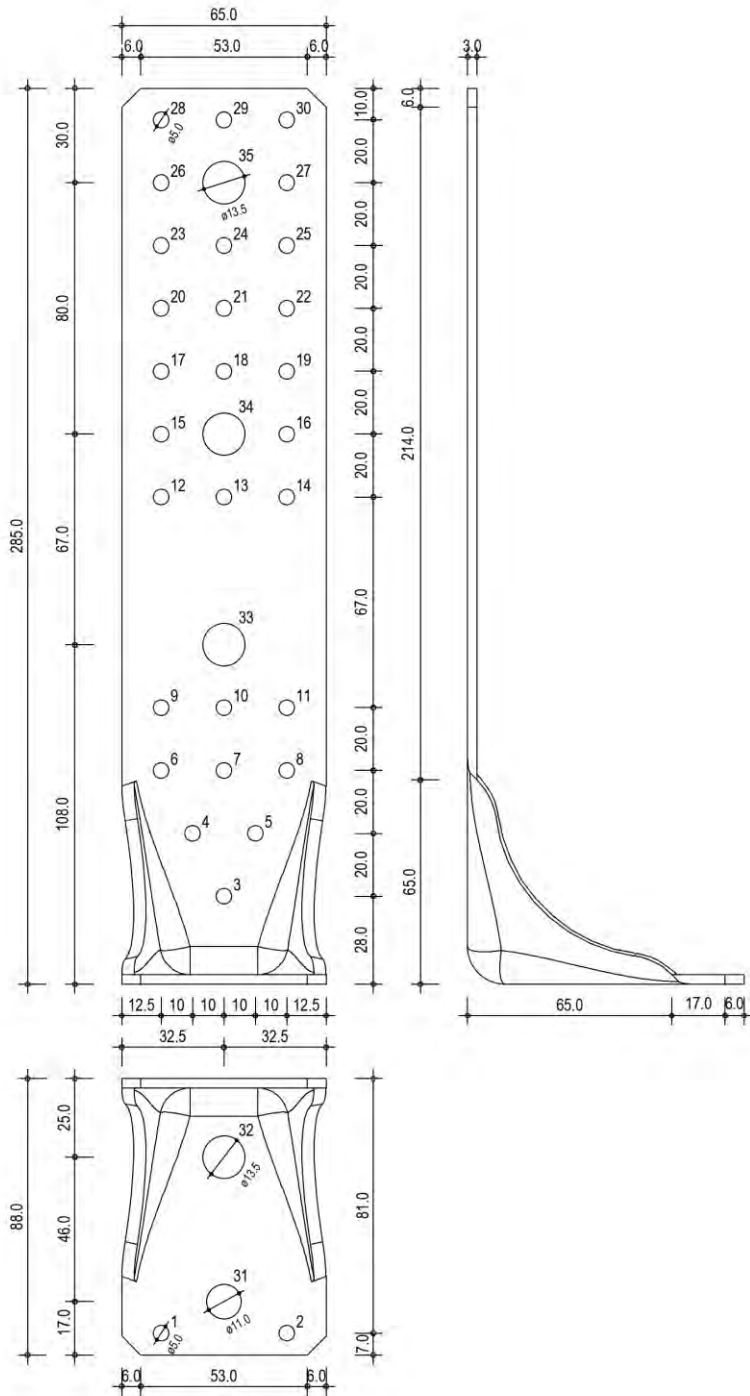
Dimensions of Angle Brackets 1102853L and 1122853L
